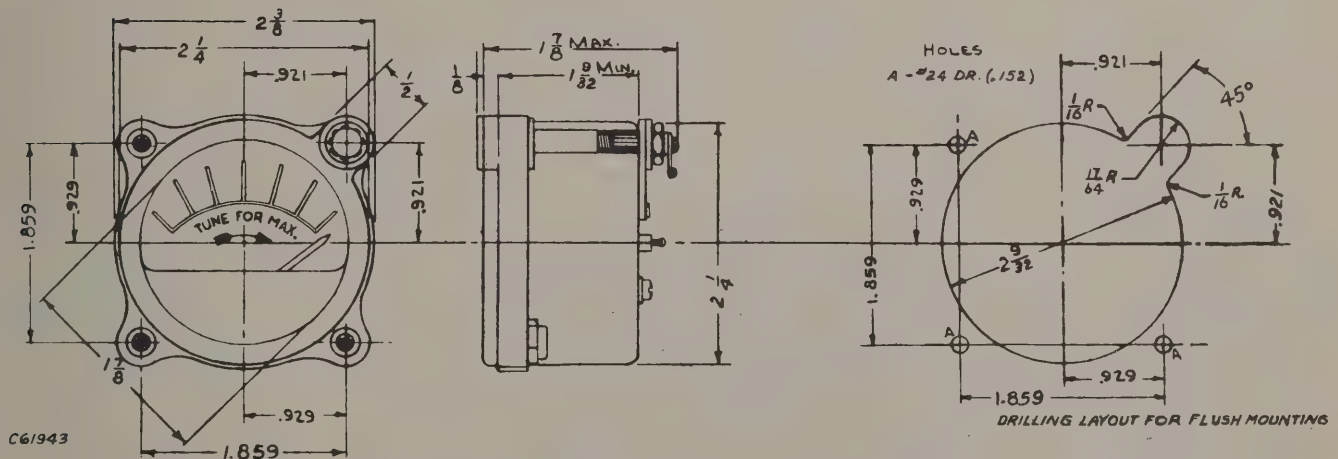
Type MR-57-A Tuning Meter, Outline and Mounting Dimensions
